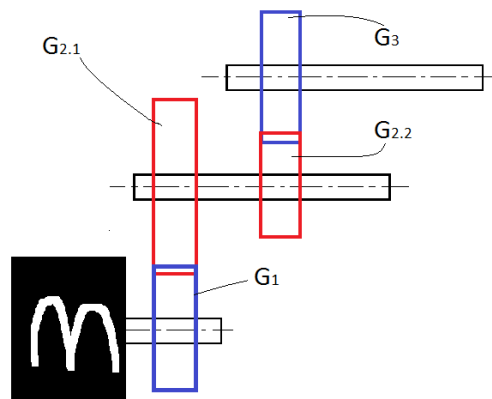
Schematic of spur gears gearbox of rotating rear wheel
